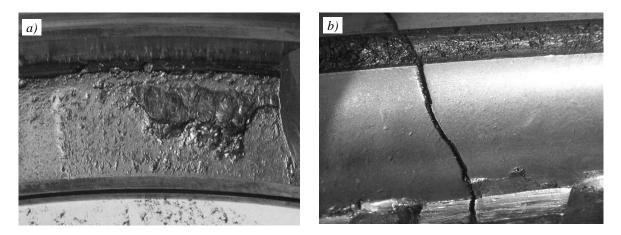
The damage to large fragments of the race of a slewing bearing: a) spalling of the hardened layer, b) crack in the ring of the bearing
